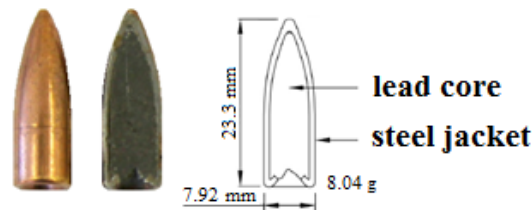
Deformable projectile 7.62 × 39 FMJ with lead core.
